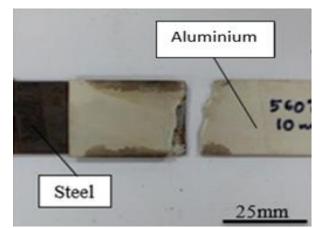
Failure location of brazed joint with 10 minutes wetting time after shear test.
